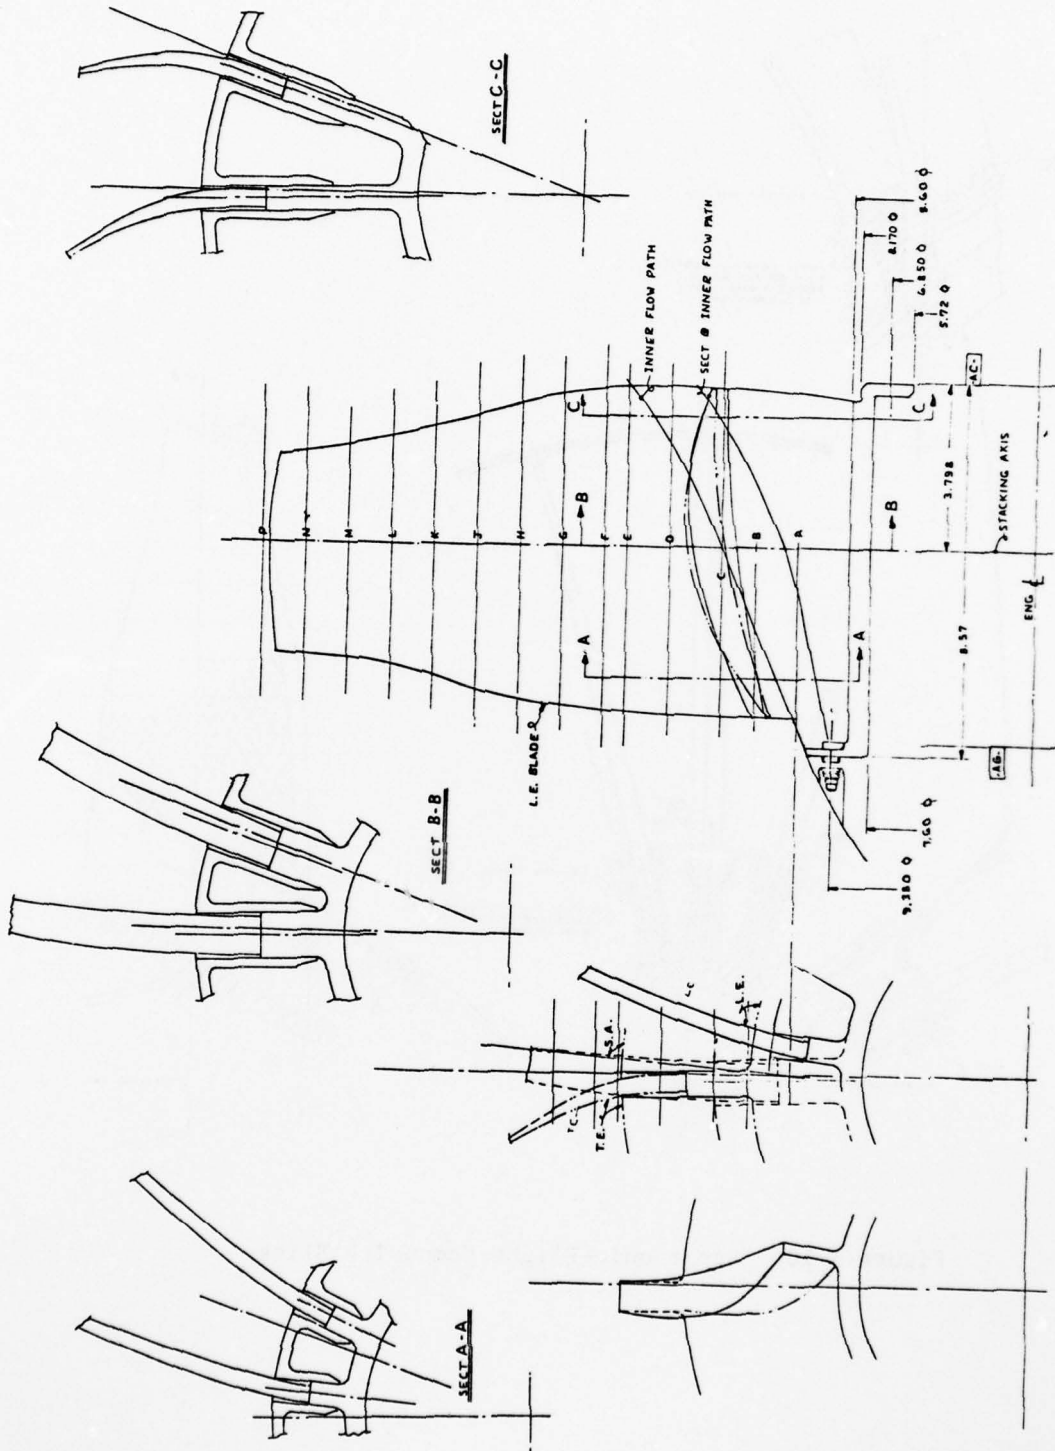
Supersonic-Flight Composite Blisk: Butt Joint Design.
